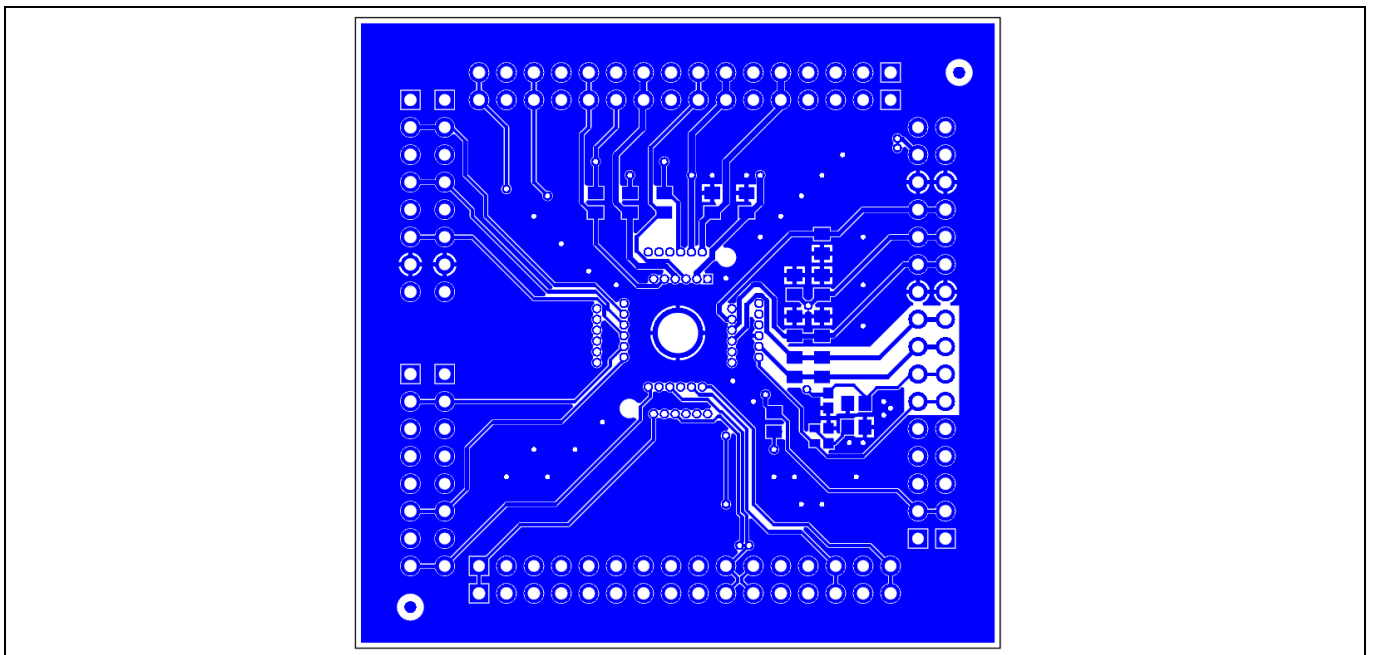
TLE988x_TLE989x TQFP48 Socketboard, Bottom layer
